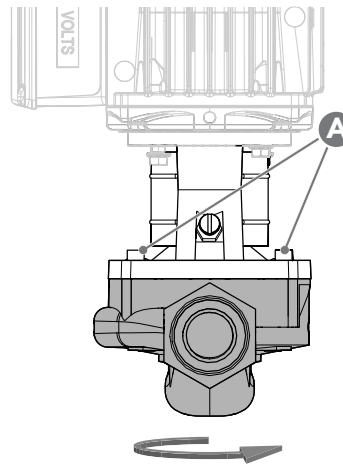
CLV pump, motor and pump volute, showing volute screws (A). Volute will need to be rotated 90 degrees as shown prior to installation on the CLV heating system.
